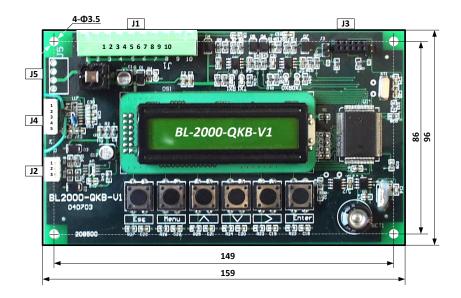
GROUP CONTROL BOARD BL2000-QKB-V1 SHAPE & DIMENSION
